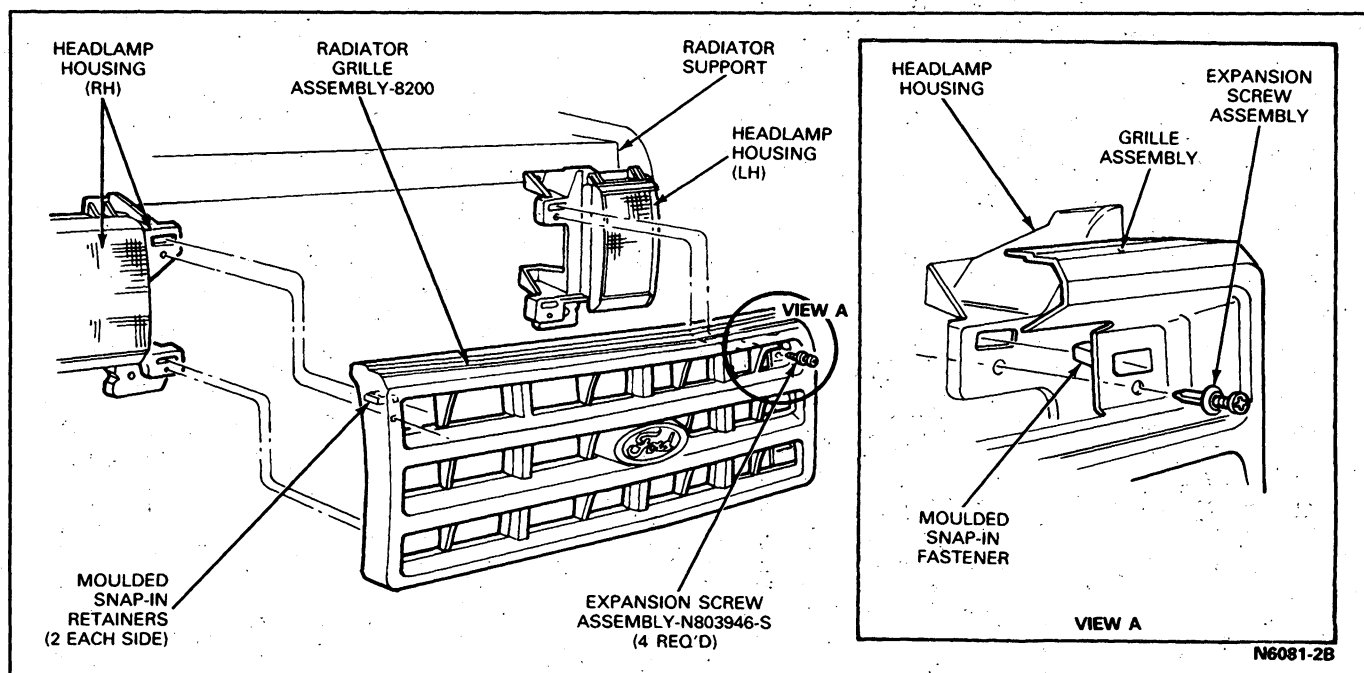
Radiator Grille—Bronco, F-150—F-350 and F-Super Duty
